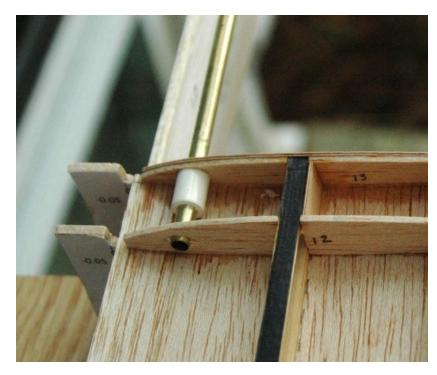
Installation of the wing tip locating pin bushings – carbon spar caps are optional
